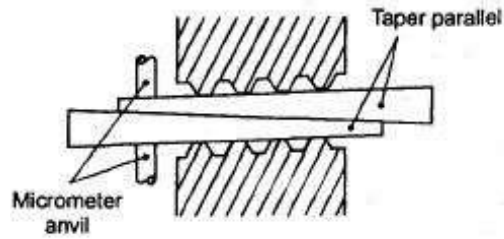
Measurement of minor diameter of internal thread using taper parallels
